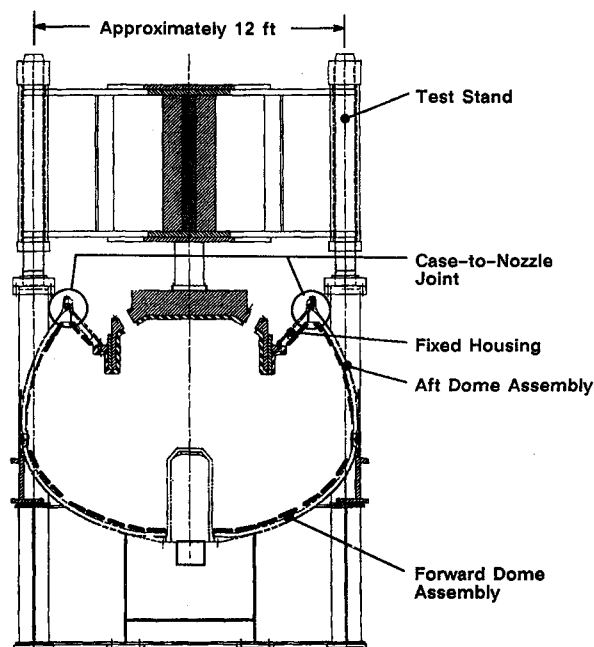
Nozzle joint environment simulator (NJES) test assembly.
